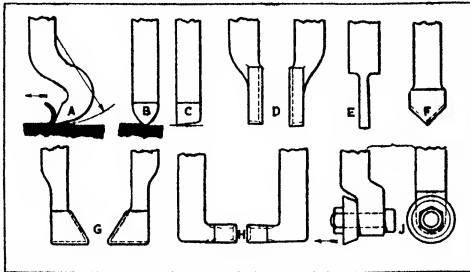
PLANER TOOLS. (A) CRANKED TO AVOID DIGGING INTO METAL. (B) FACE OF ROUGHING TOOL. (C) FACE OF FINISHING TOOL. (D) RIGHT- AND LEFT-HAND KNIFE OR SIDE TOOLS. (E) PARTING, CUTTING-OFF OR GROOVING TOOL. (F) V TOOL. (G) RIGHT- AND LEFT-HAND TOOLS FOR V-SLOTS. (H) SAME FOR T-SLOTS. (J) RADIUS TOOL IN HOLDER
